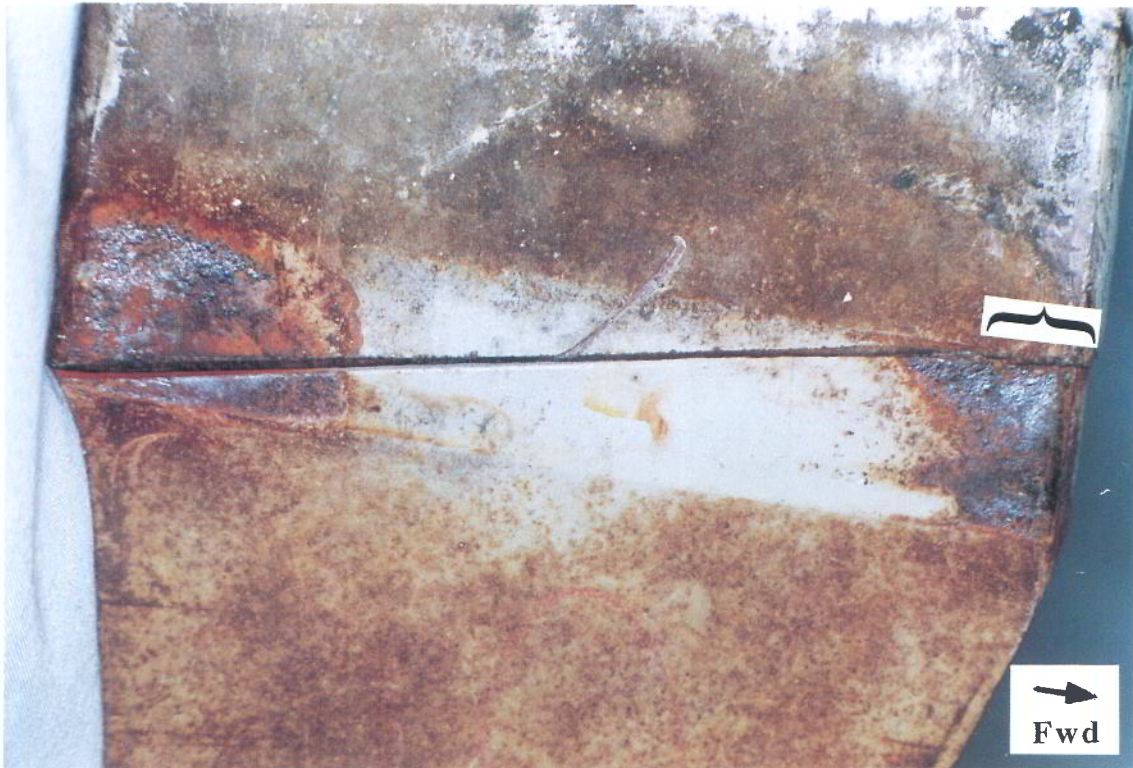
Top surface of mainleg failure area with extent of fatigue fracture indicated and showing corrosion and fretting in contact areas within support housing
